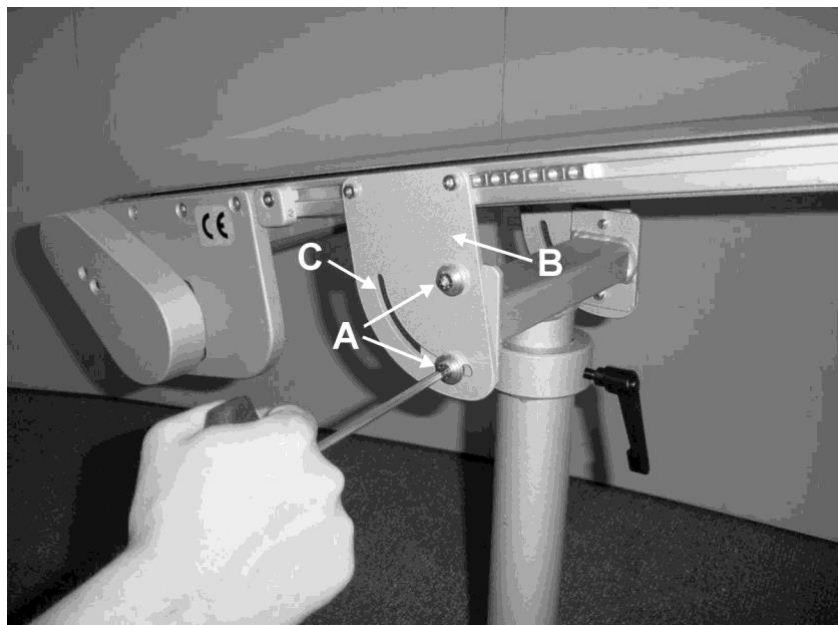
Single-legged support made of steel with aluminium base plate, inclination adjustment
